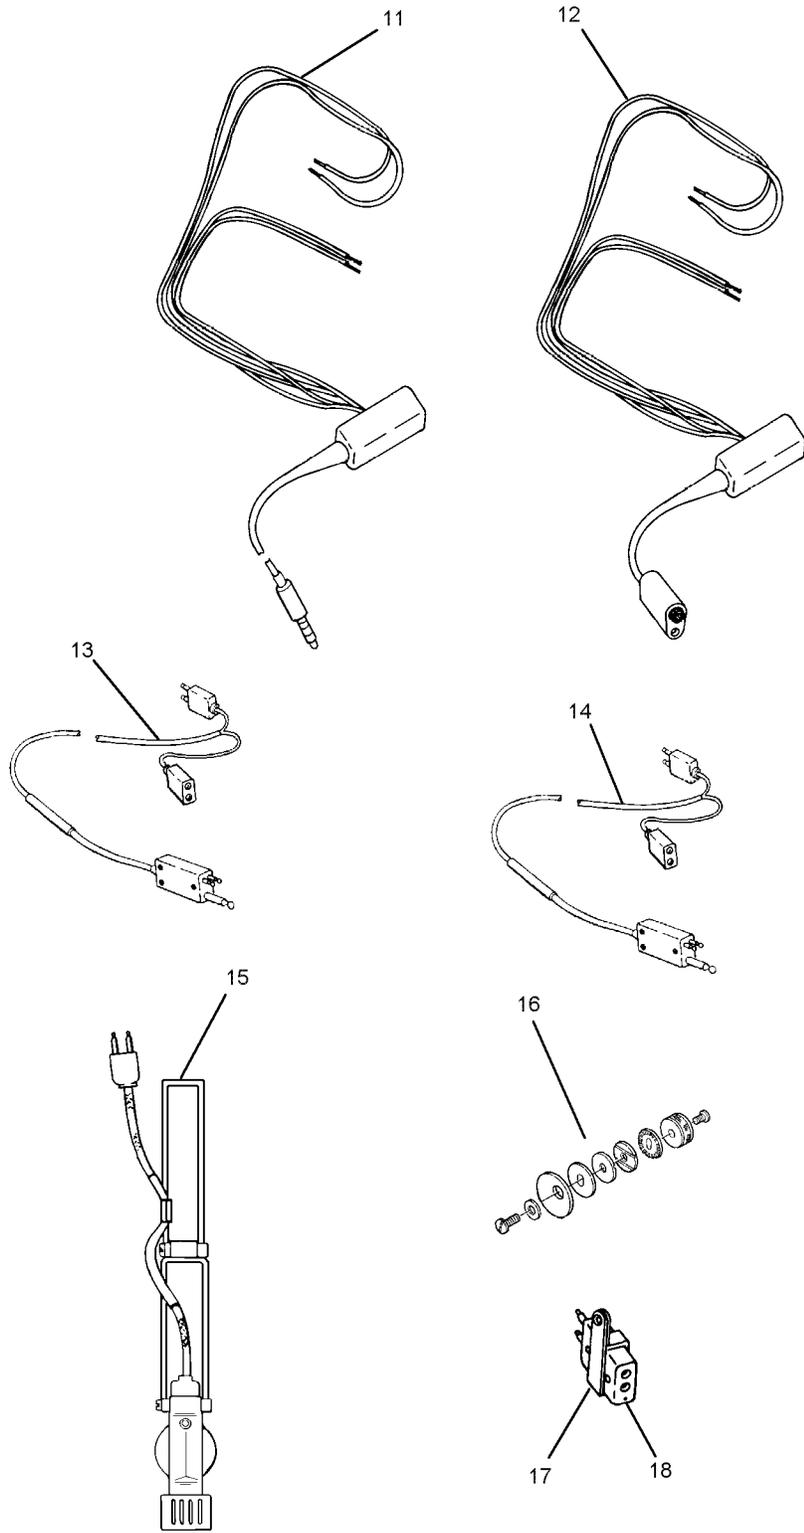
HGU-68(V)/P Helmet Assembly (Sheet 2 of 2)
